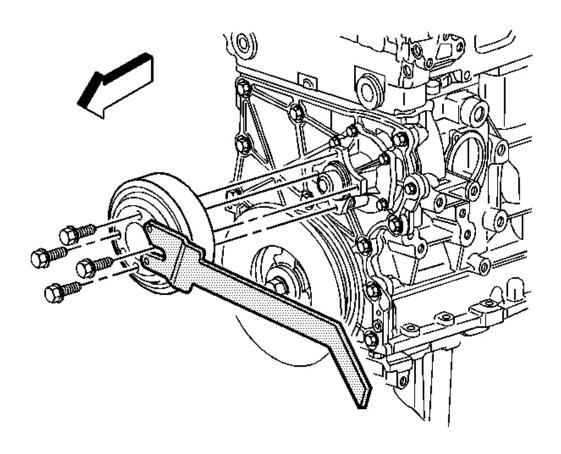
View Of Water Pump Pulley & Bolts Courtesy of GENERAL MOTORS CORP.
